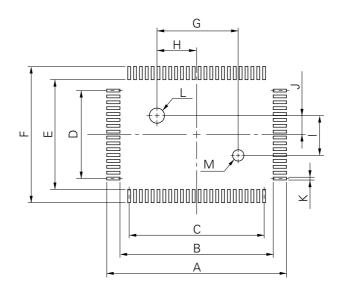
EV-9200G-80 Package Drawing (for Reference Only)
